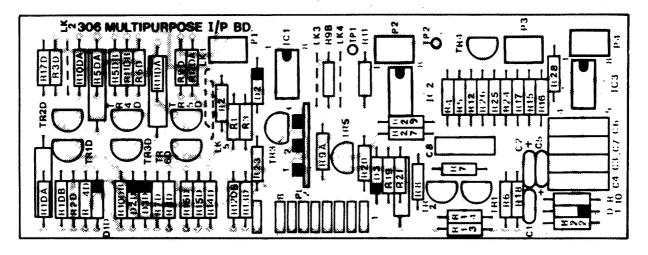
MULTI-PURPOSE INPUT BOARD, PCB COMPONENT LAYOUT (Drawing No.AH128204, Issue 3)
